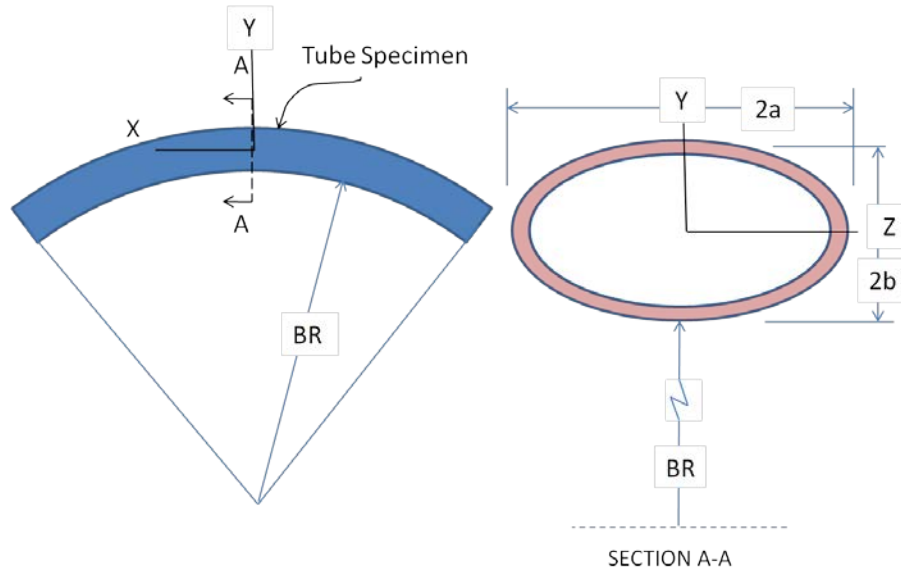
9 : Bend radius and cross-section oval dimensions a and b
